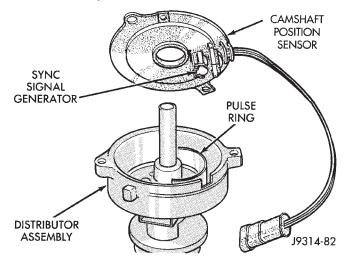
Distributor and Camshaft Position Sensor-Typical (5.2L Shown)
